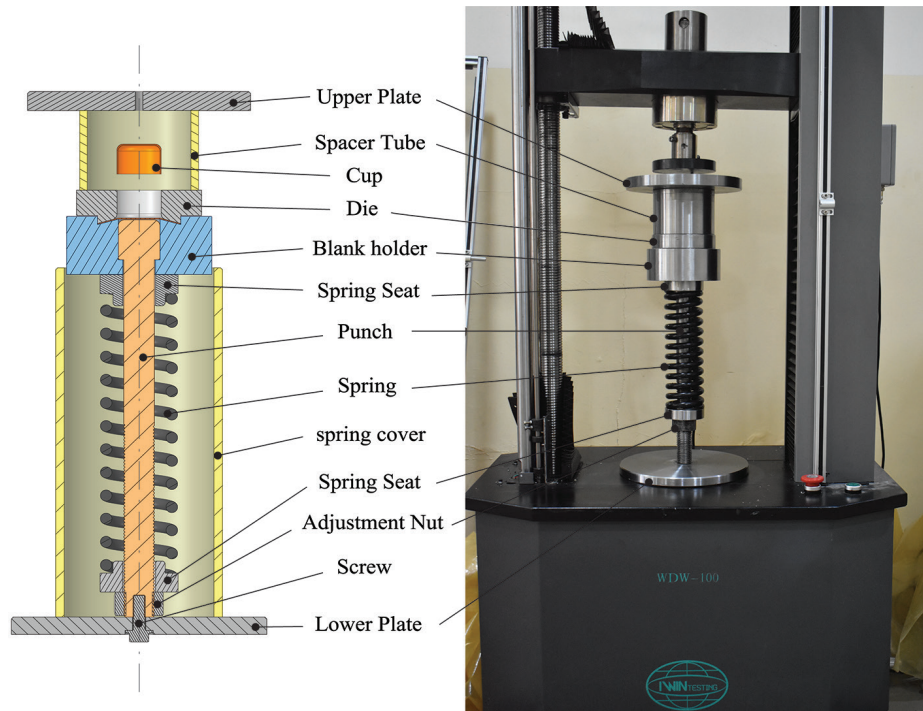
Deep drawing process experimental set up: a) cross sectional view of internal assembly highlighting component names, b) tooling jig mounted on WDW-100 kN machine
